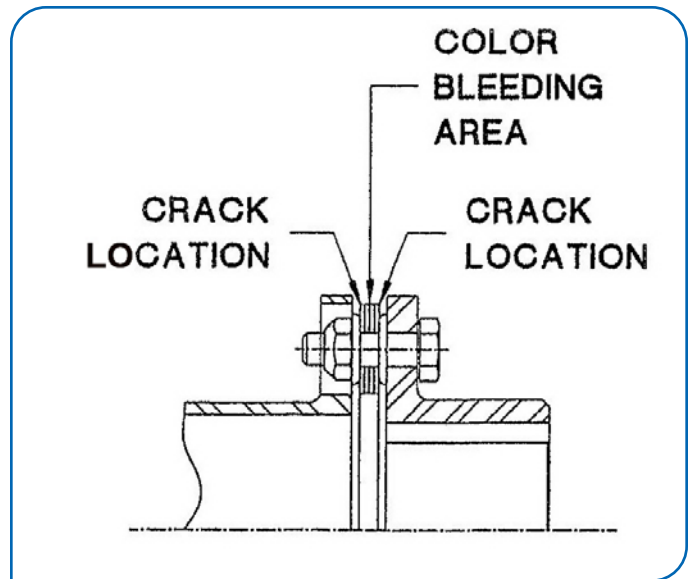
Fatigue failure due to excessive misalignment.
